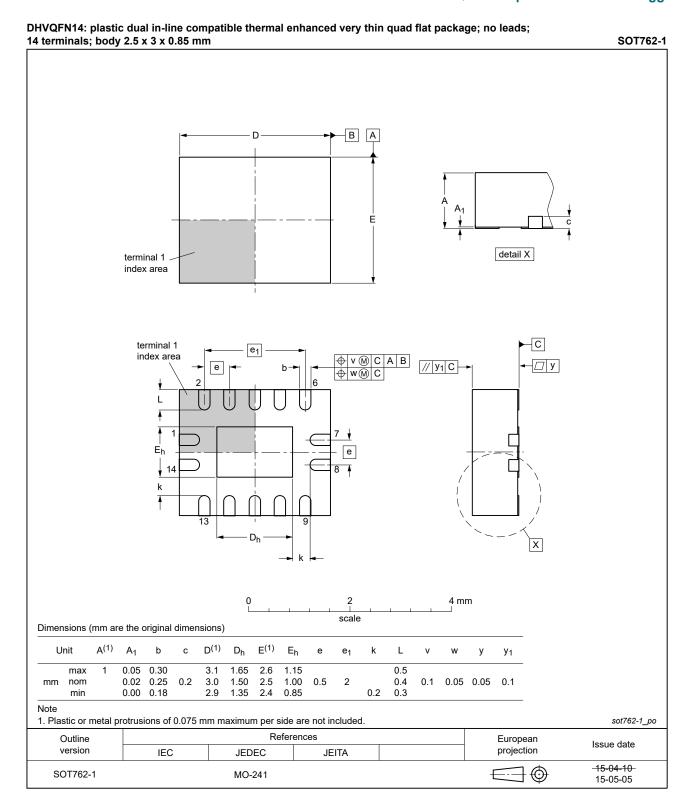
Package outline SOT762-1 (DHVQFN14)
